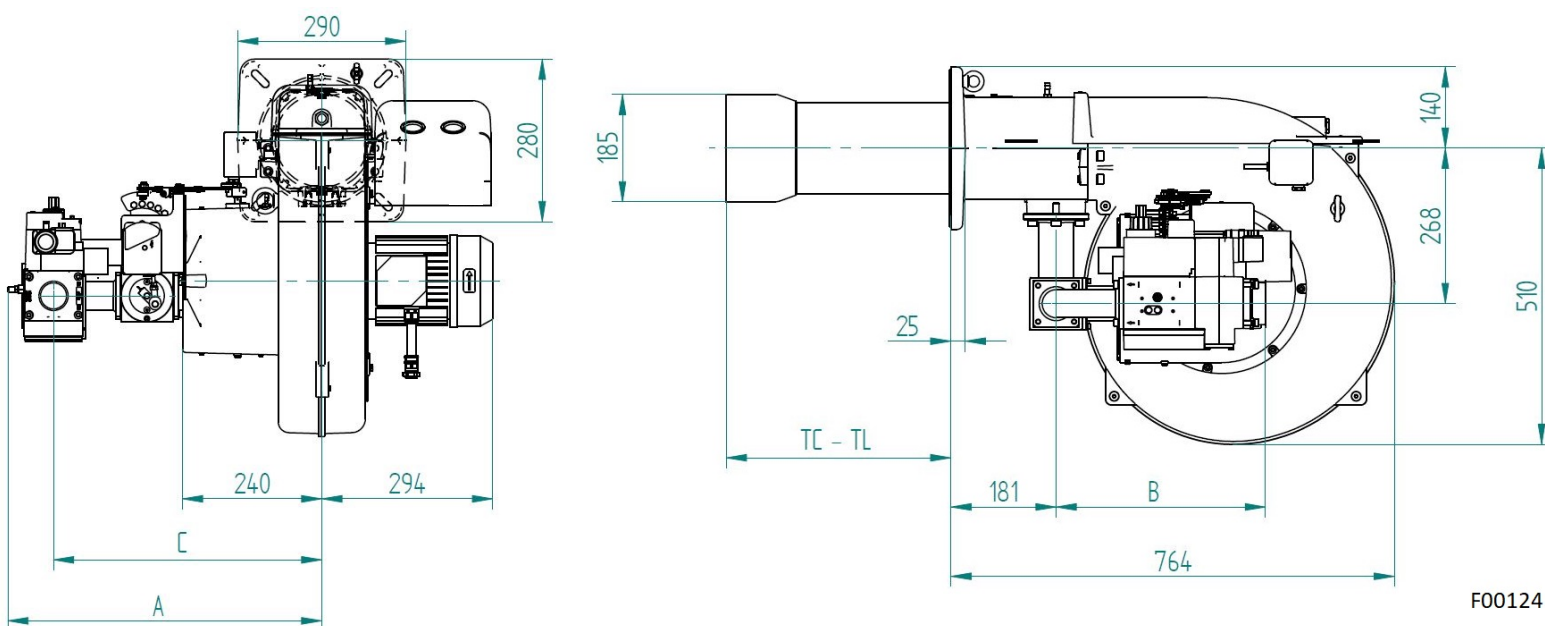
Dimensions GAS P100/MCE LX4 EVO
